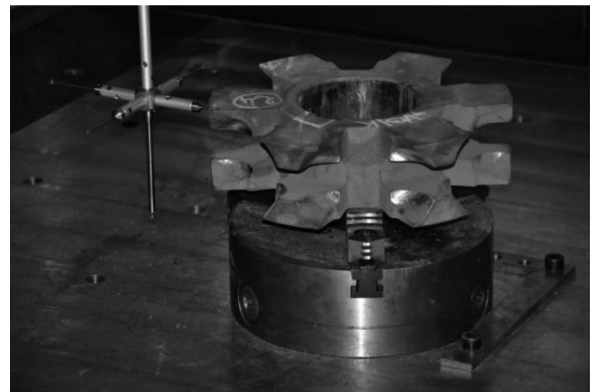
Gear assembly used in mining applications cast for the research purposes
